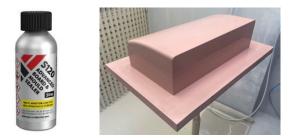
S120 board sealer (left) and master plug after finished surface preparation process.
